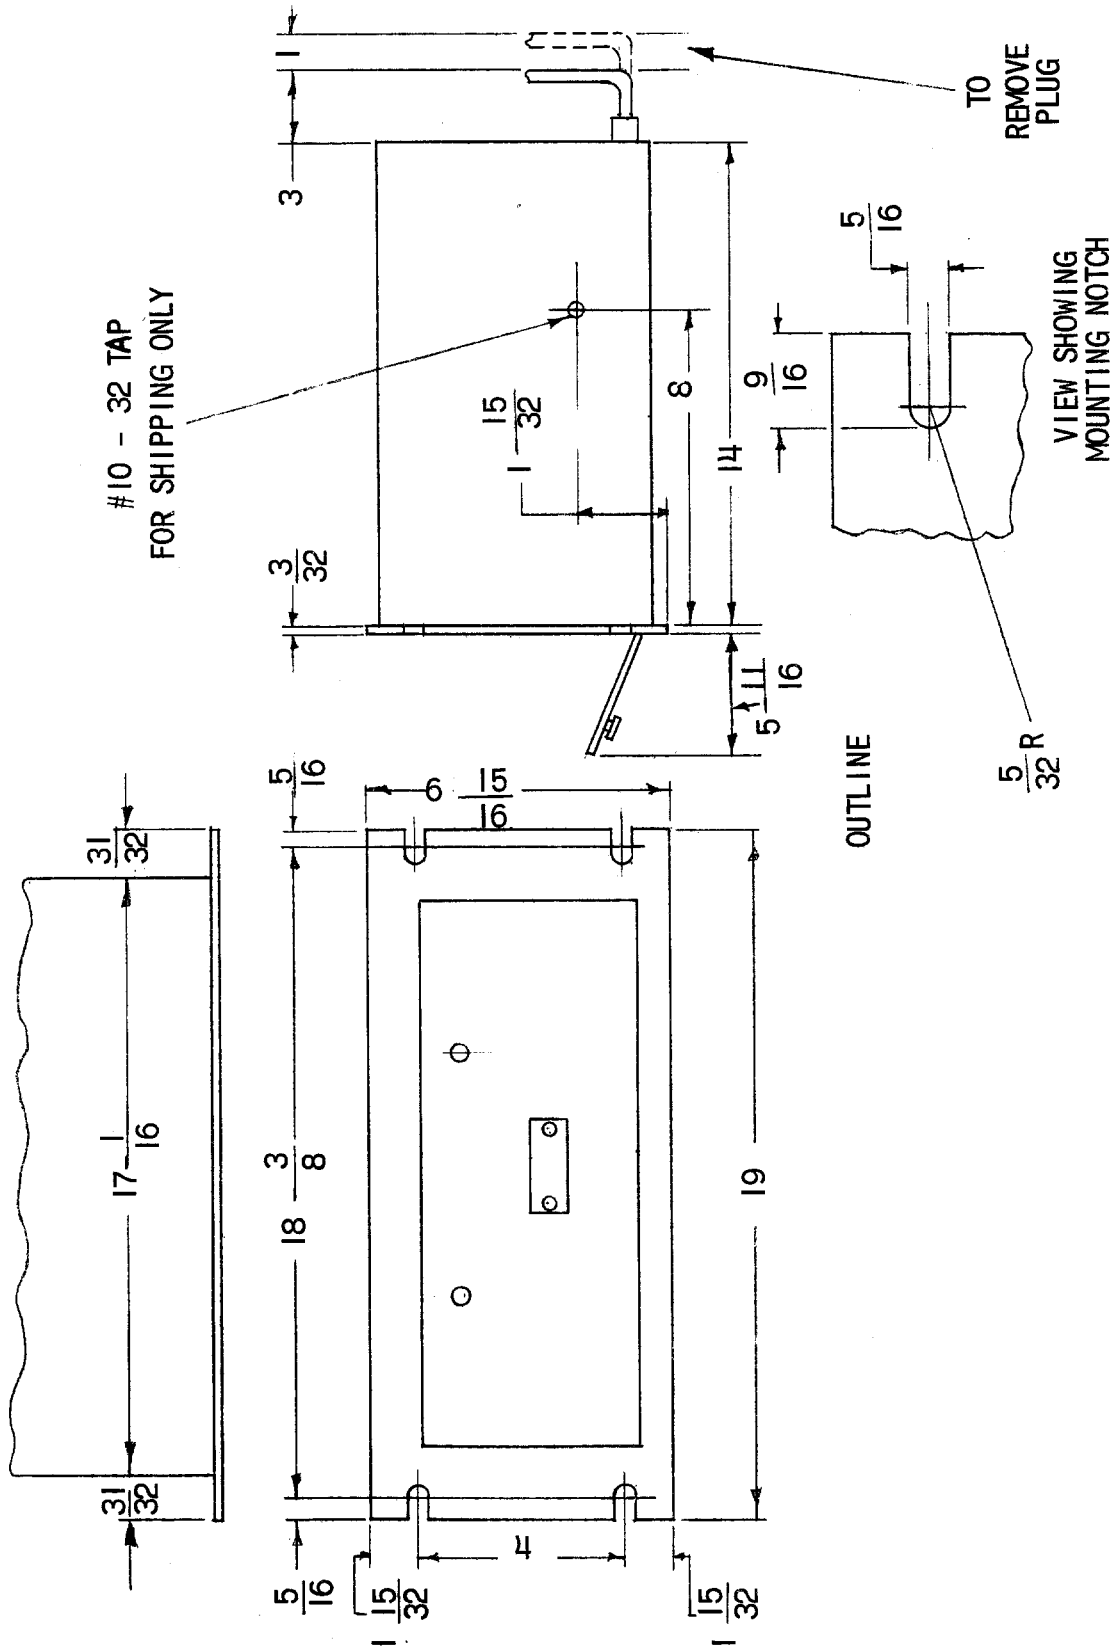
(0227A2037-0) OUTLINE AND MOUNTING DIMENSIONS FOR THE SLAT51K RELAY
